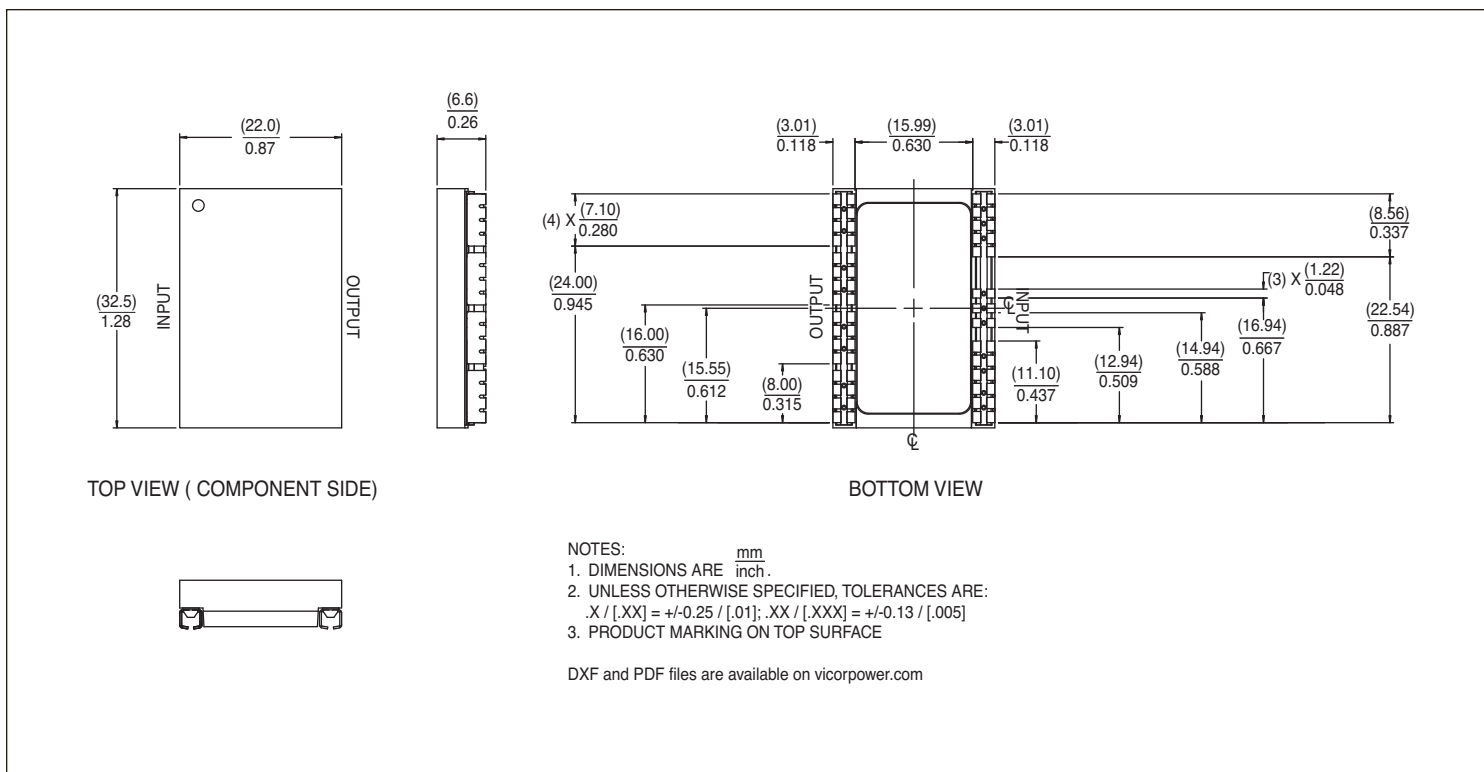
VTM J-Lead mechanical outline; Onboard mounting
